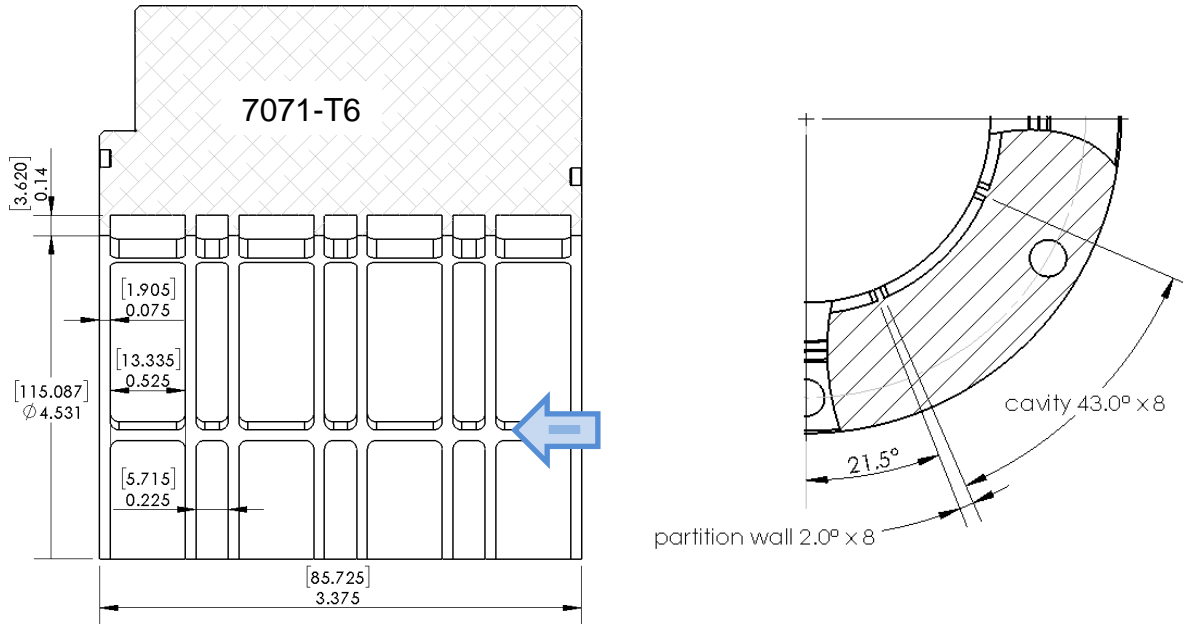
Cut-view of test FPDS depicting seal dimensions in [inch] mm.
